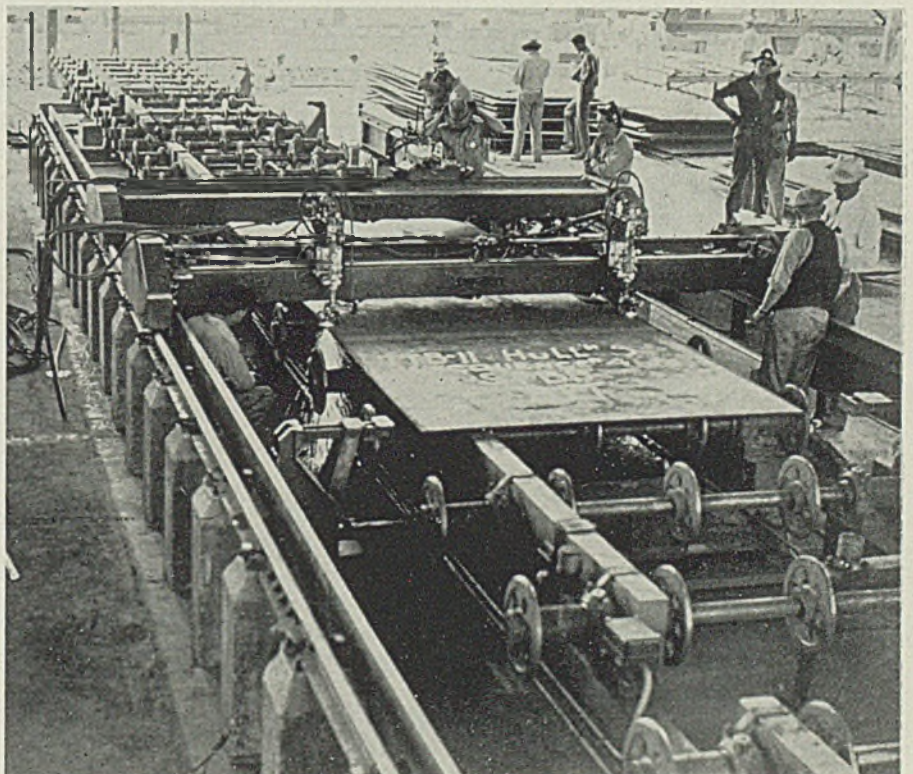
Typical bevel cutting setup where torch is guided by track or accurately steered by the operator—using one blowpipe
